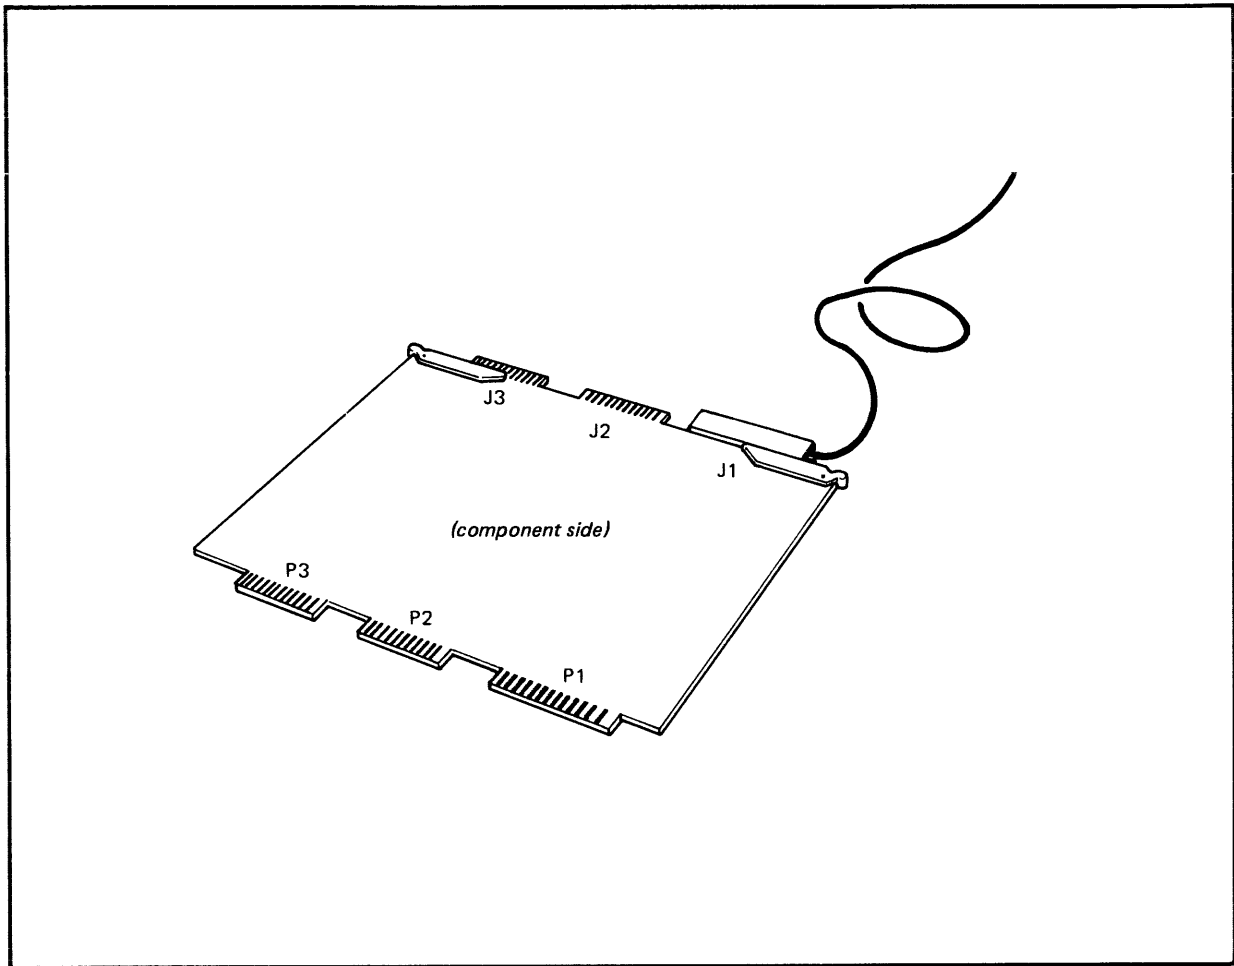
Connecting the Interface Cable Assembly to the Universal Interface PCA
